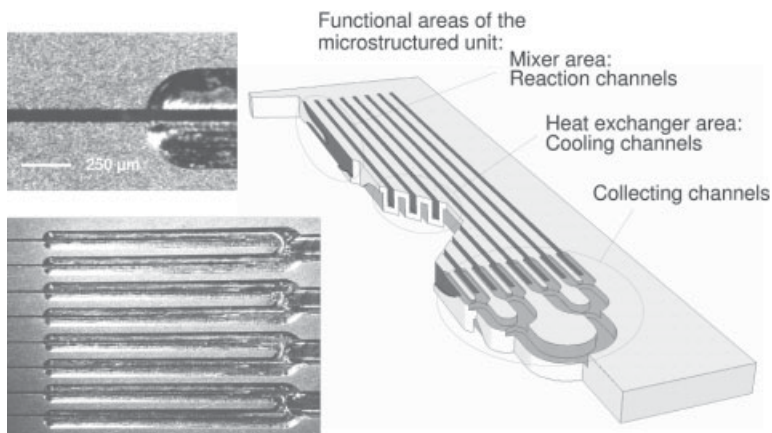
Schematic of the bi-layer contacting reaction platelet and photographs of details of the transfer region micro channel-collecting channel (left top) and of the array of the collecting channels (left bottom) [56].
